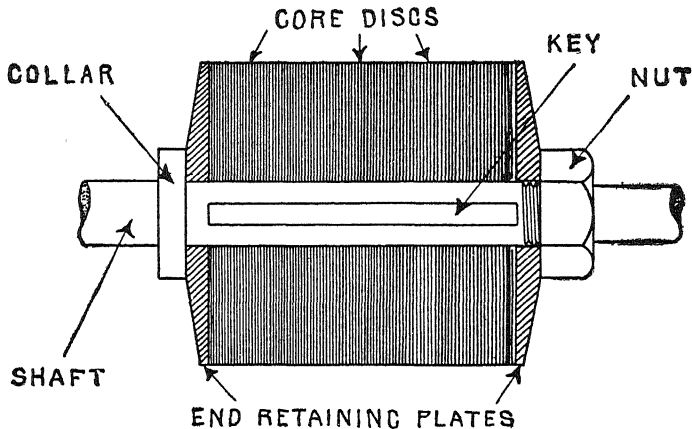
Sectional view of laminated smooth core armature showing end plates, flange and retaining nut. A key is provided to prevent rotation of the core with respect to the shaft.
